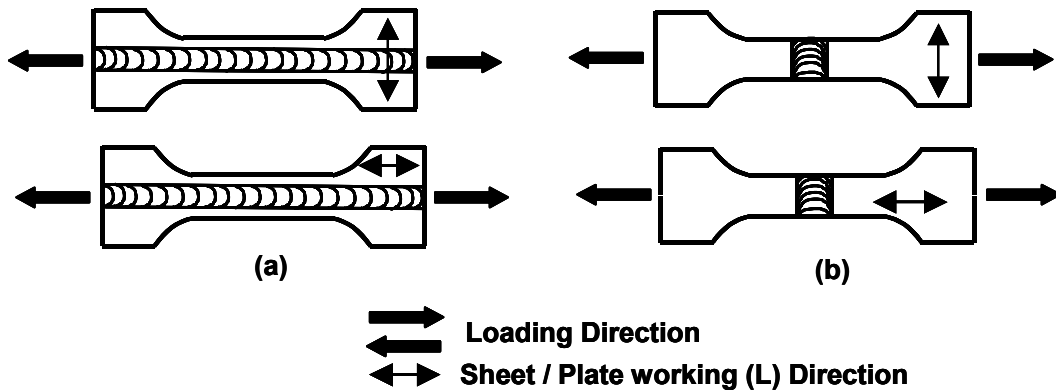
Tensile testing with respect to weld orientation in sheet and plate stock.
